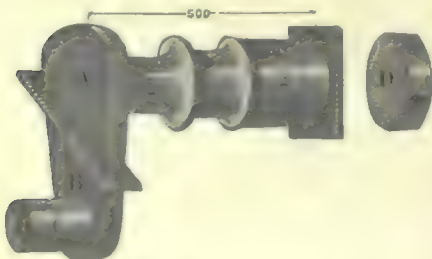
Butt Welding a Crank Shaft.
